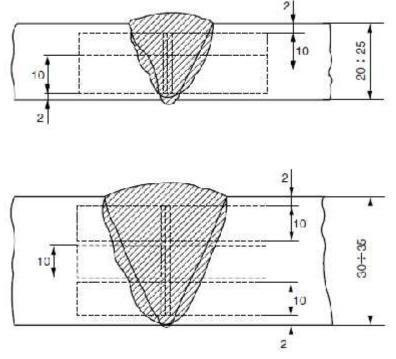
Position of Charpy V-notch impact test for one side automatic welding
